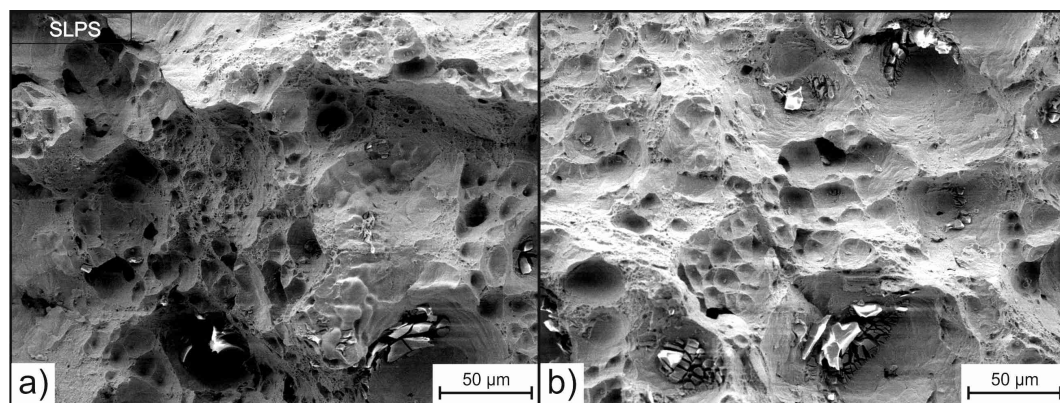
Overview of fracture surface, SLPS specimen
